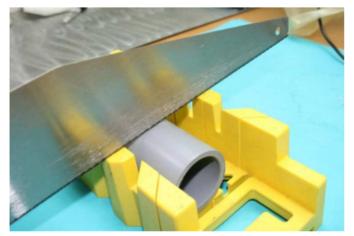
Apparatus for Cutting PipeCut the pipe straight at a 90° angle.
